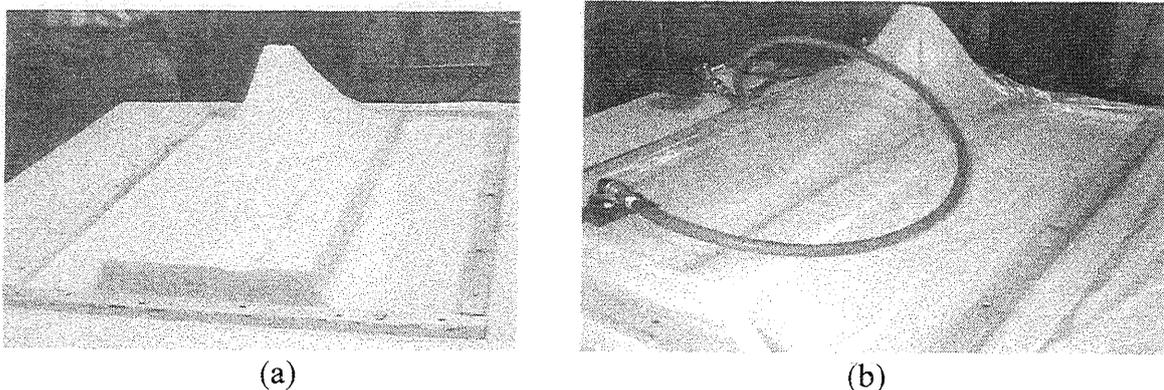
Vacuum Bagging Process for Wind Turbine Airfoil: (a) Latex Rubber Vacuum Formed on the Foam Mold (b) Vacuum Bagged Wind Turbine Skin Panel.[5]
